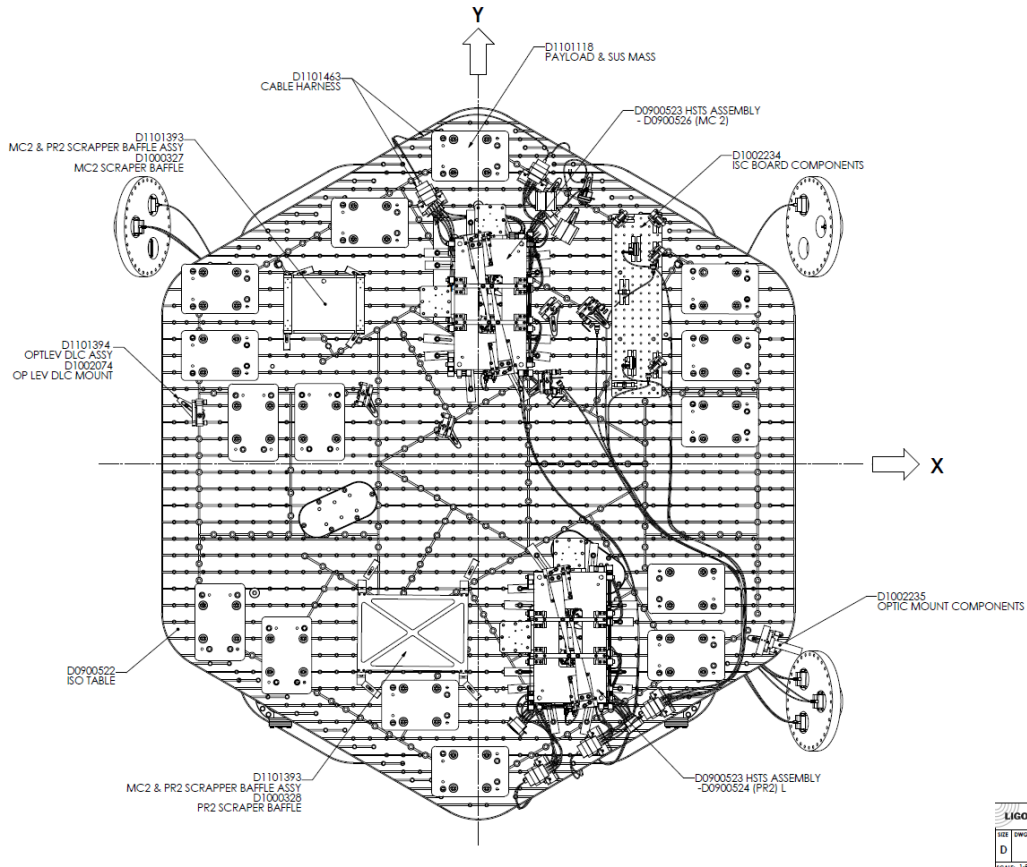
LHAM3 ISI Assembly ([D0900520](#))
